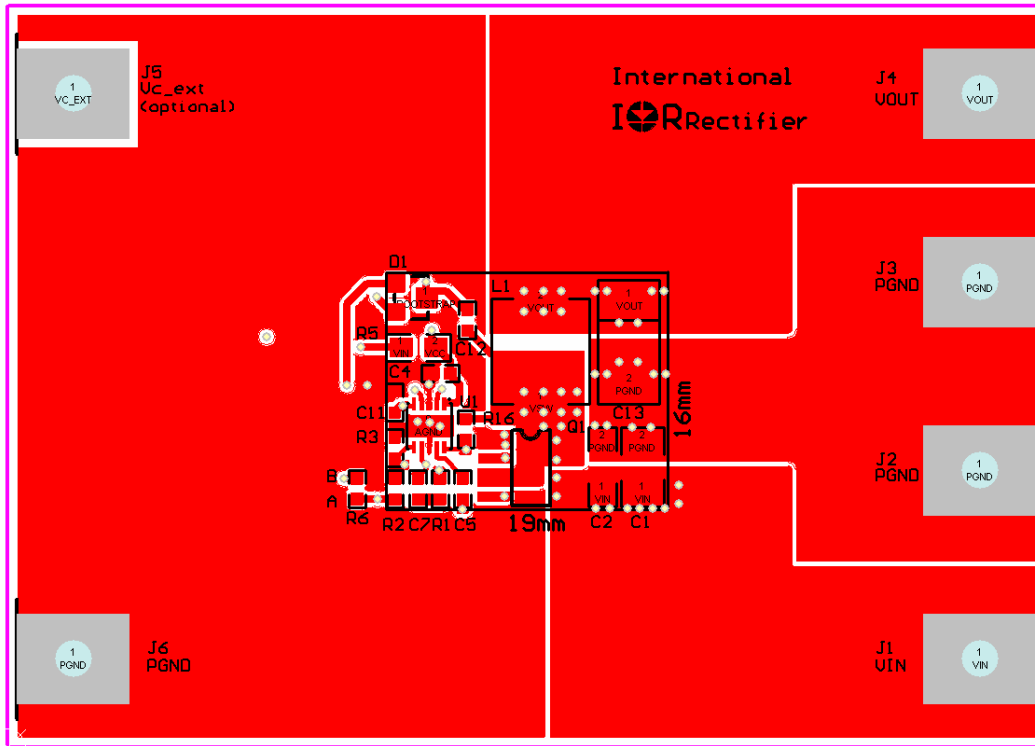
IRPP3624-05A Reference Design top layer placement and layout.
